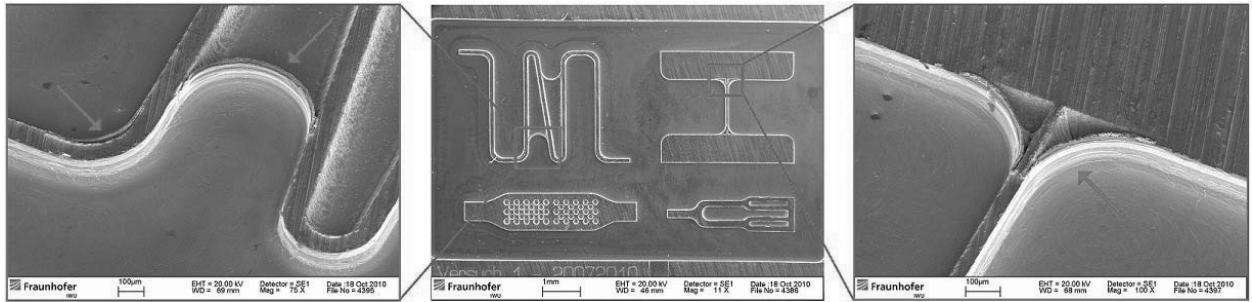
(a) Crossover section between laser (above) and milling area; (b) Test structure; (c) An unrequested bar between milling and laser area
